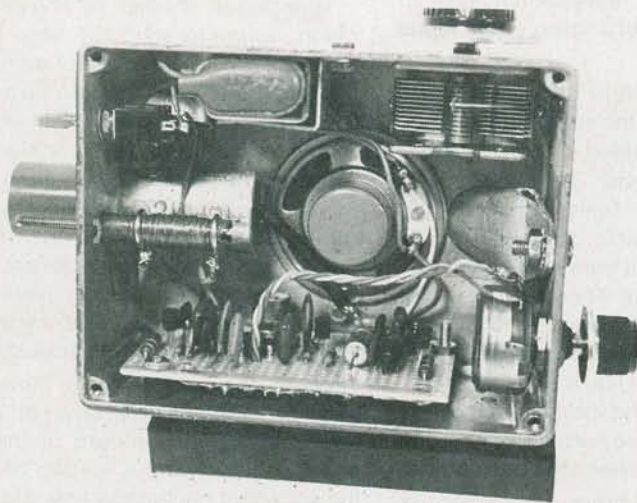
Photo showing inside of author's prototype. The shaft fits through hole at left. Handle and speaker are shown on the back of enclosure here.
